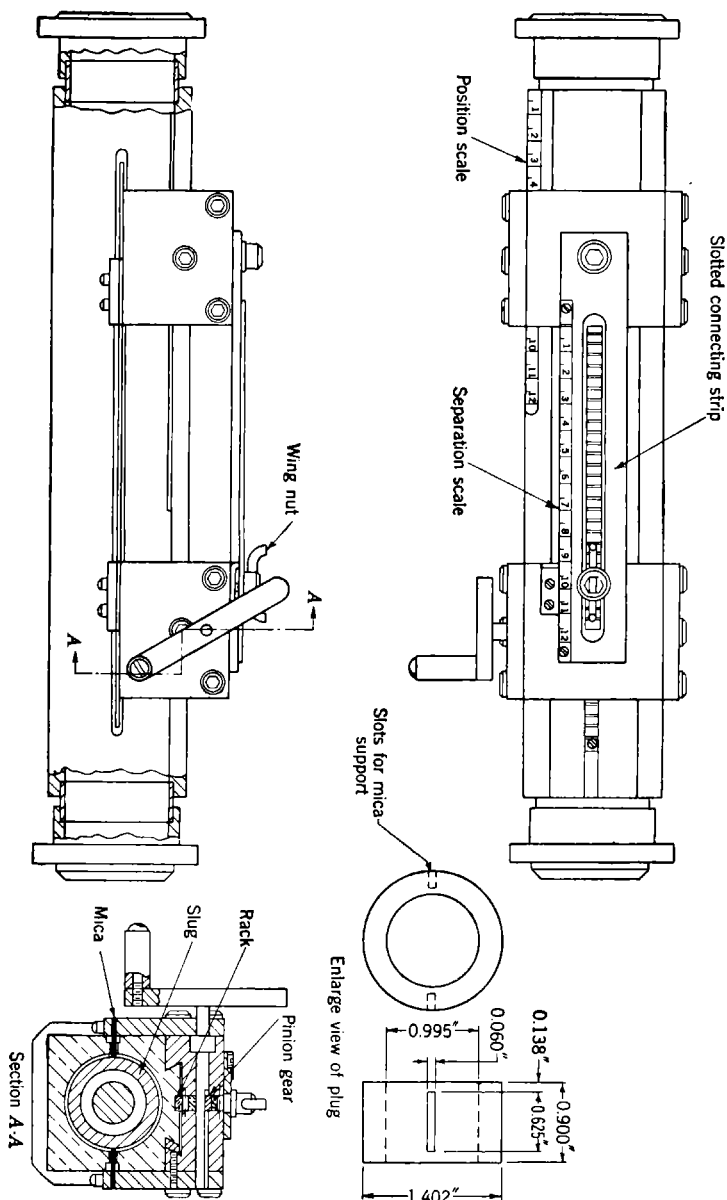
Double-slug tuner for $1\frac{5}{8}$ -in. coaxial line.
